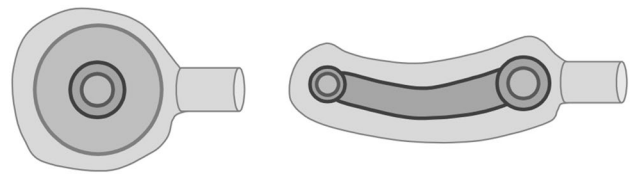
Examples of the considered forged parts (left: compact forged part; right: long forged part)
